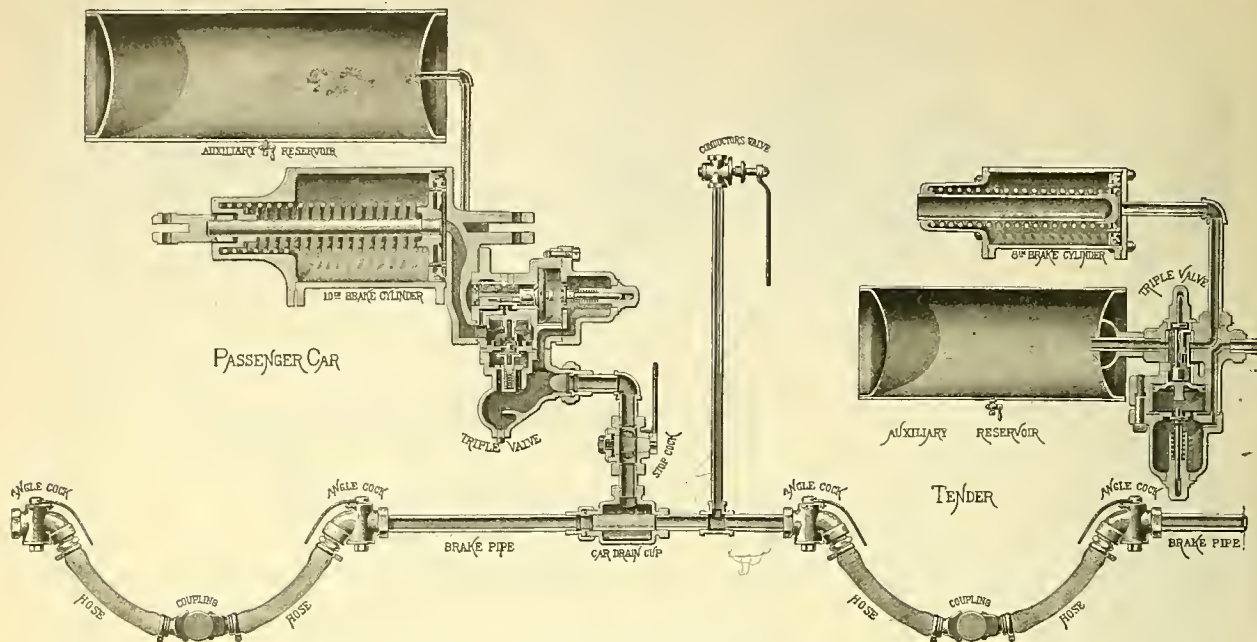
Sectional View, showing general arrangement of apparatus.
